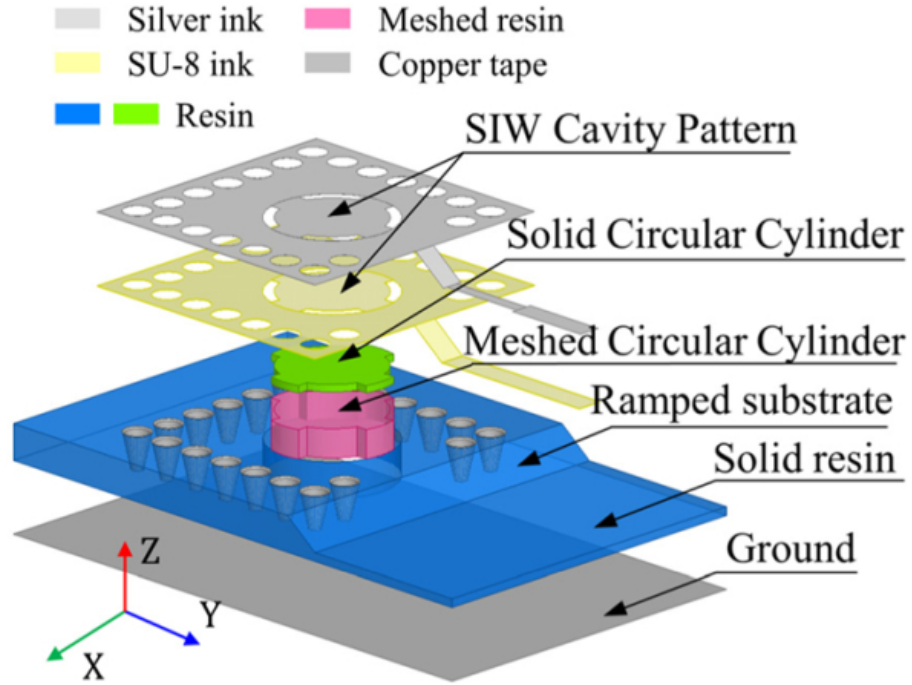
Design of the hybrid printed SIW cavity pressure sensor in perspective view.
